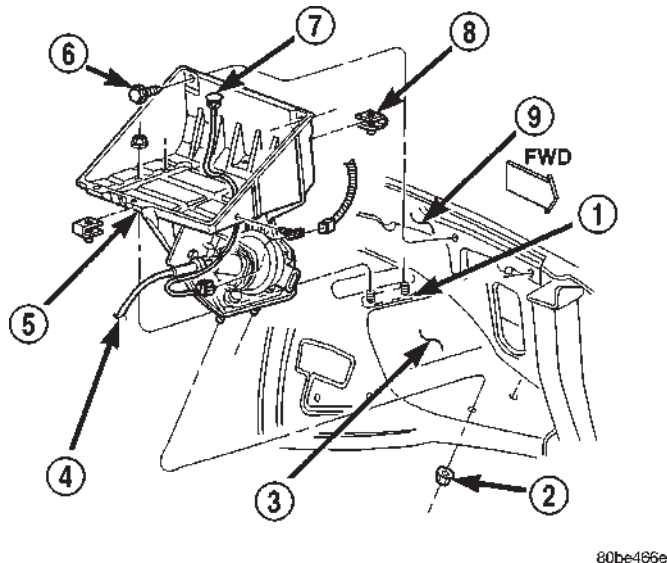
Left Battery Tray Remove/Install - Typical for Right Battery Tray
